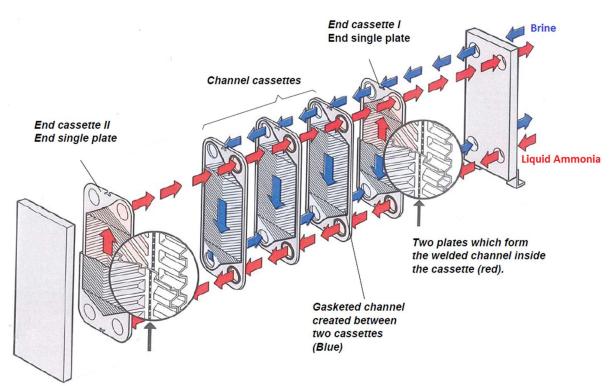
Cassette arrangement forming the Semi-Welded Plate Heat Exchanger Alfa Laval, General instruction manual, Semi Welded Plate Heat Exchanger 3490006213 rev 2014-07
